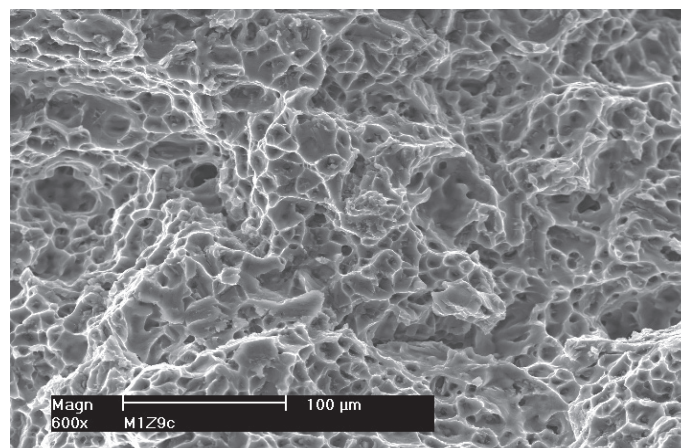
Fracture of 5083 alloy welded by MIG
